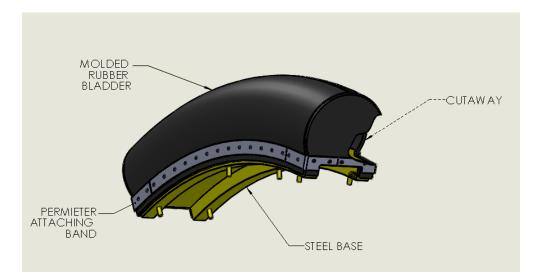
Primary Seal Bladder Segment with Cut Away
